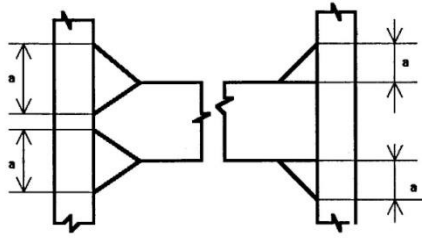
Definition of "a" for types of weld 10 and 11
